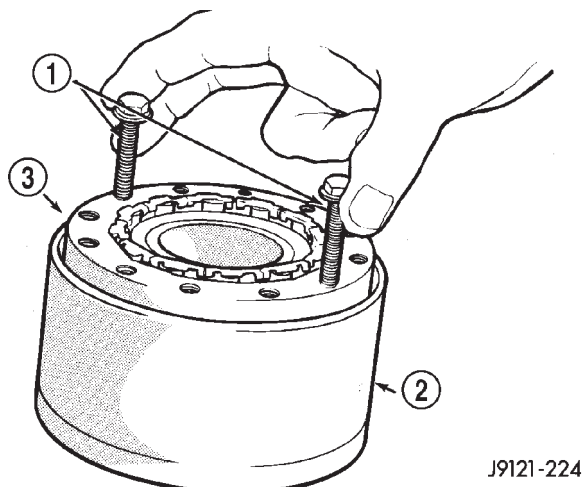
Removing Overrunning Clutch From Low-Reverse Drum
